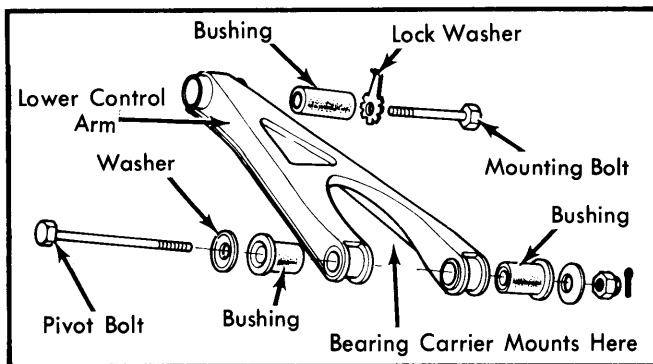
Lower Control Arm with Detail of Mounting Bushings
